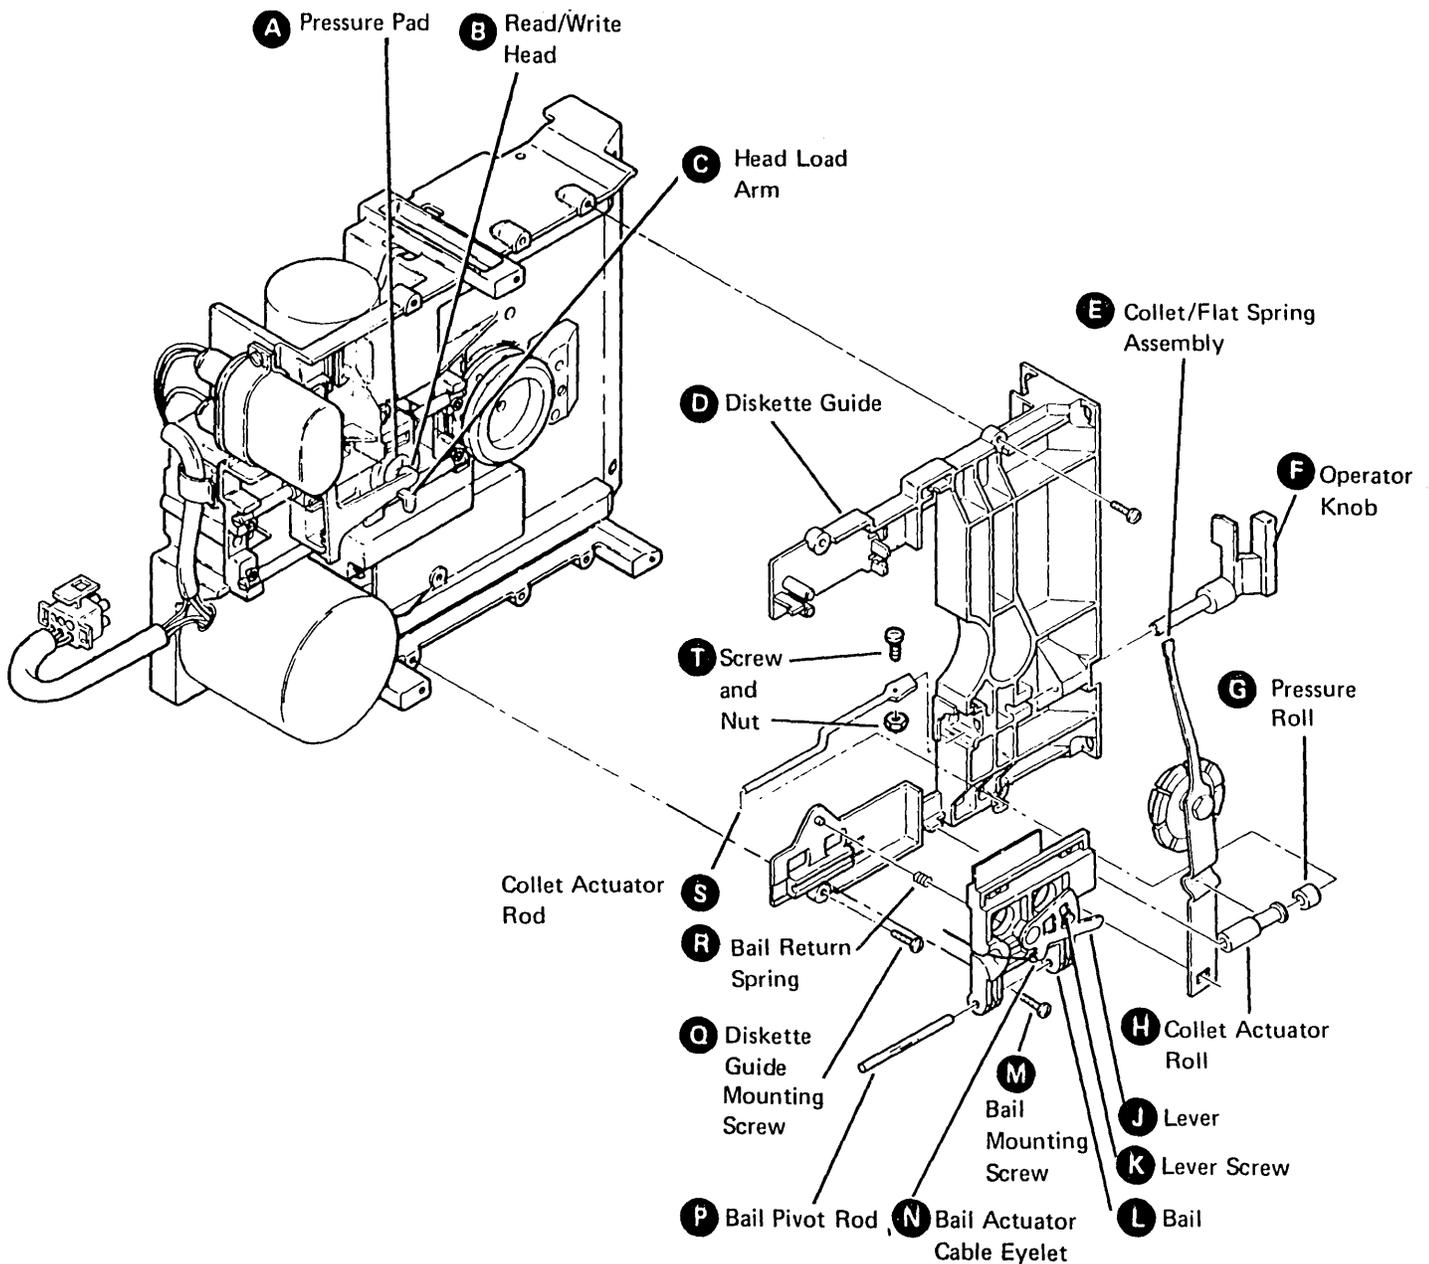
(Part 1 of 2). Collet/Flat Spring Removal
